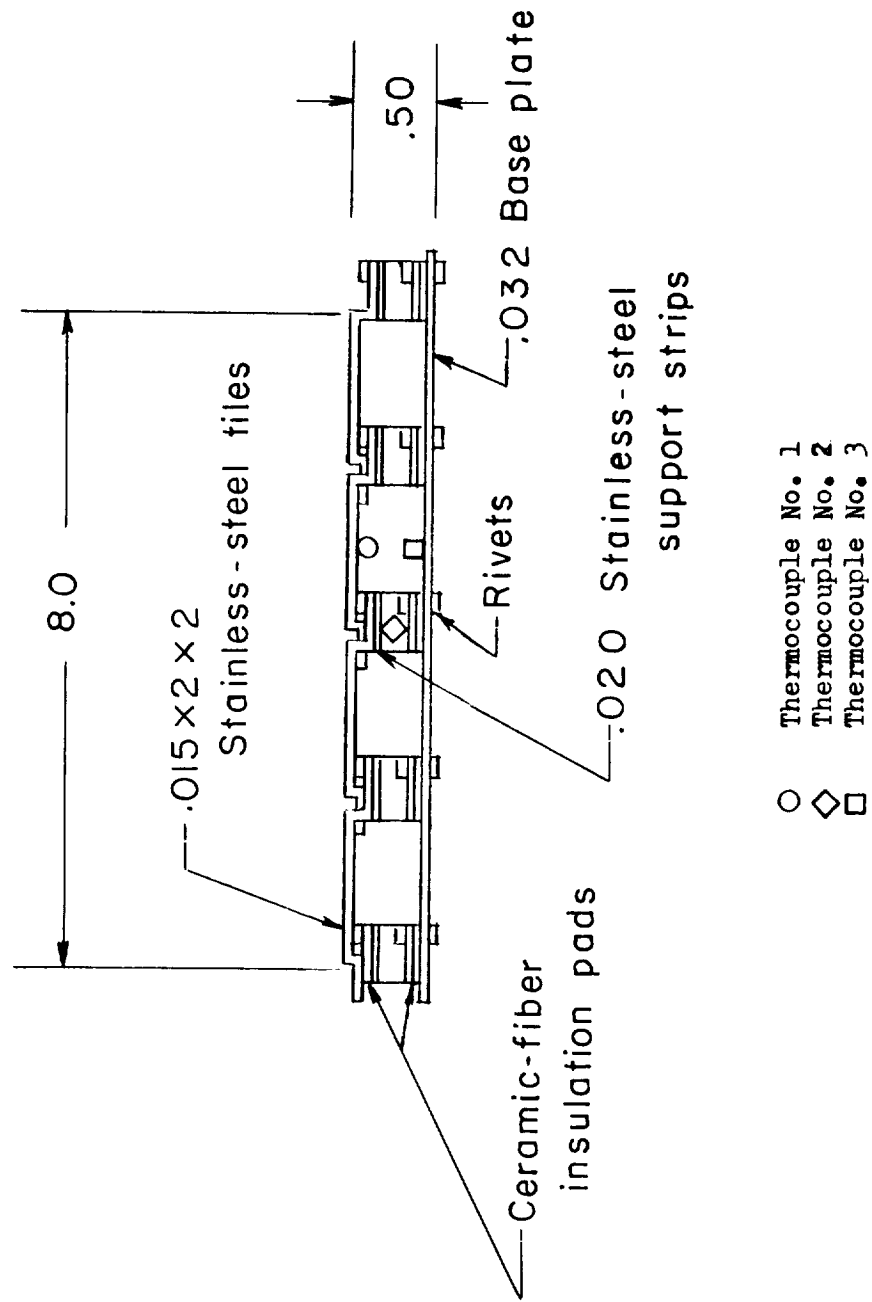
Cross section of stainless-steel-tile heat shield. Dimensions in inches.
